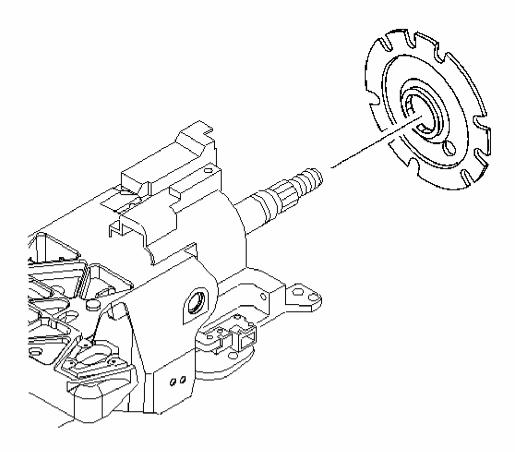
View of Shaft Lock Shield Assembly Courtesy of GENERAL MOTORS CORP.
